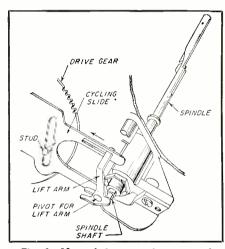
Most of the operating parts of a spindle-type record drop mechanism.
